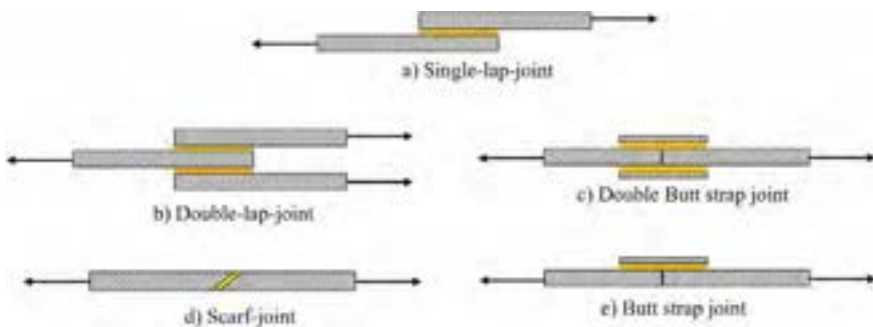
Examples of structural adhesive overlap joints encountered in the construction, automotive, and aerospace industries.
